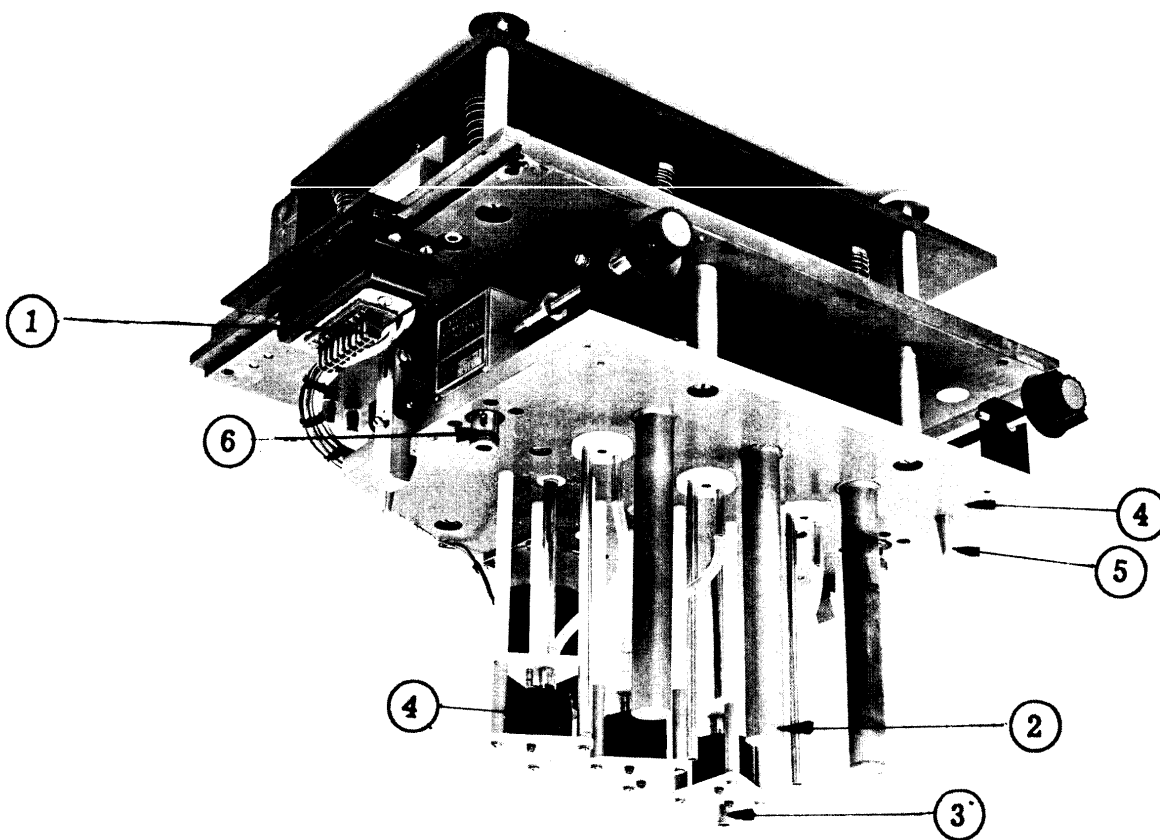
PROCESSING ASSEMBLY (CHEMICAL SUPPLY TANKS REMOVED)
